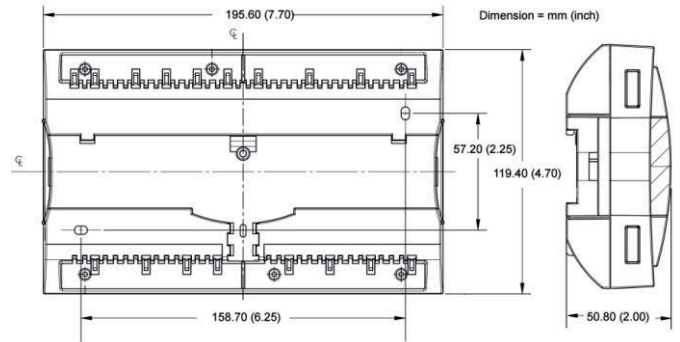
Remote-I/O – ECC-401 & 520 Series dimensions
